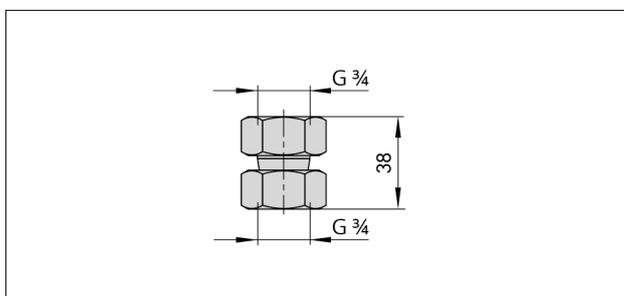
Connecting piece (including gasket) for $G \frac{3}{4}$ valve
